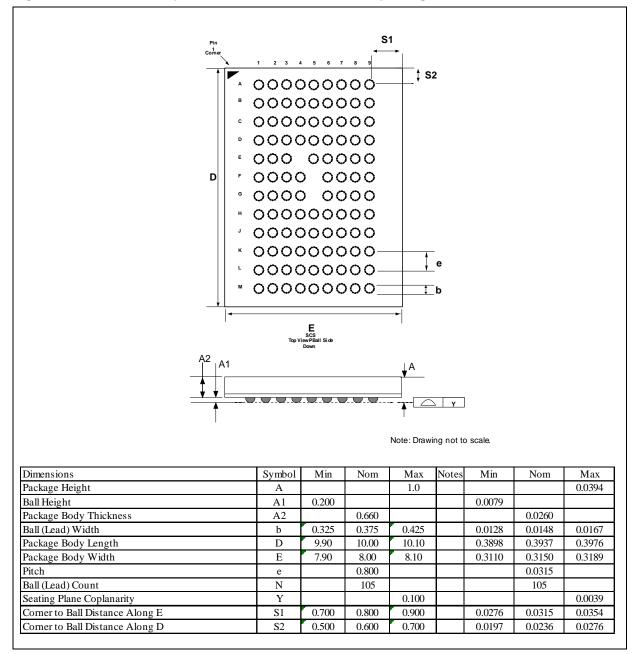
Mechanical Specifications: x16D (105-ball) package (8x10x1.0 mm)
